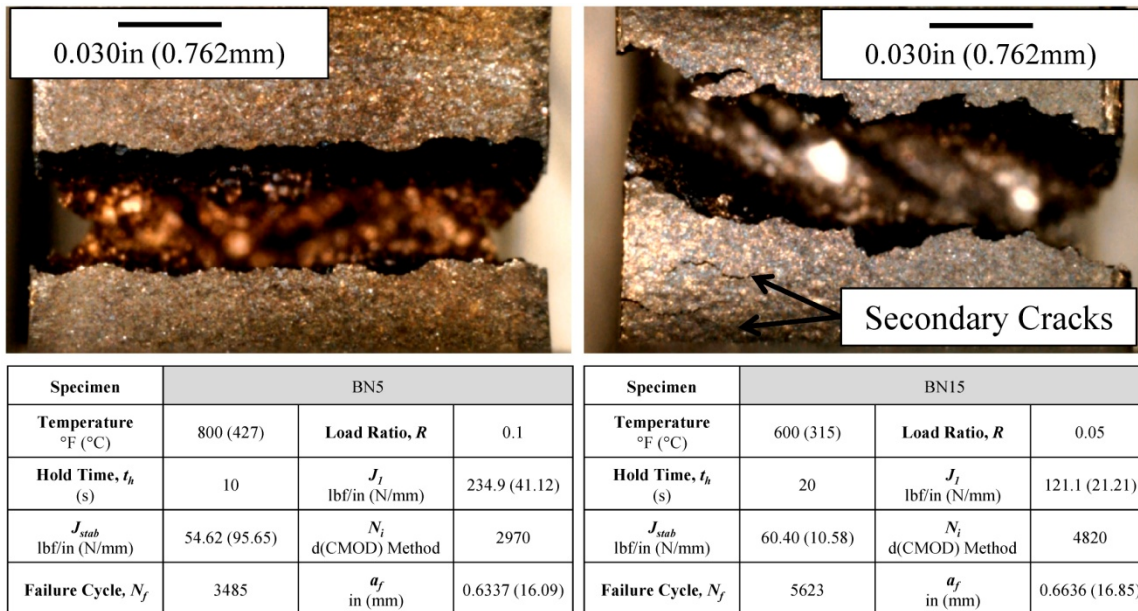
Overview of fracture surfaces of C(T) specimens upon separation of specimens
